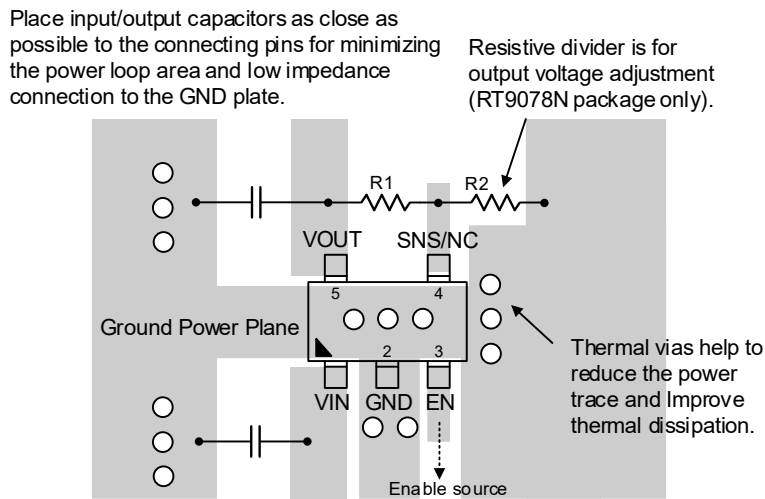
PCB Layout Guide for TSOT-23-5 Package
